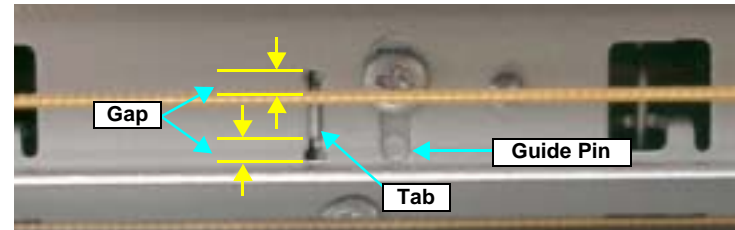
Checking the Position of Tab on the Guide Roller LD
